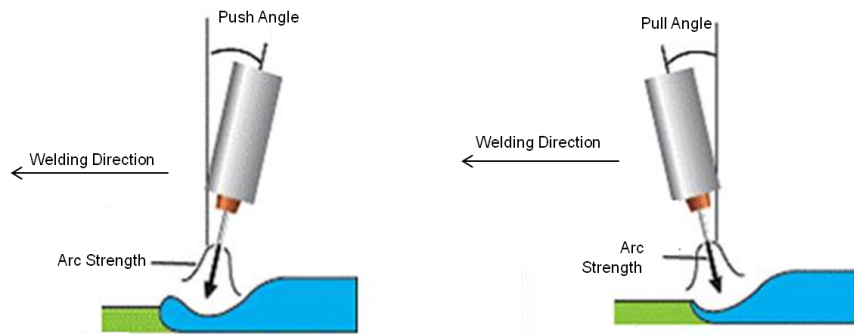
Torch angles and welding technique (Brooks, 2008)
